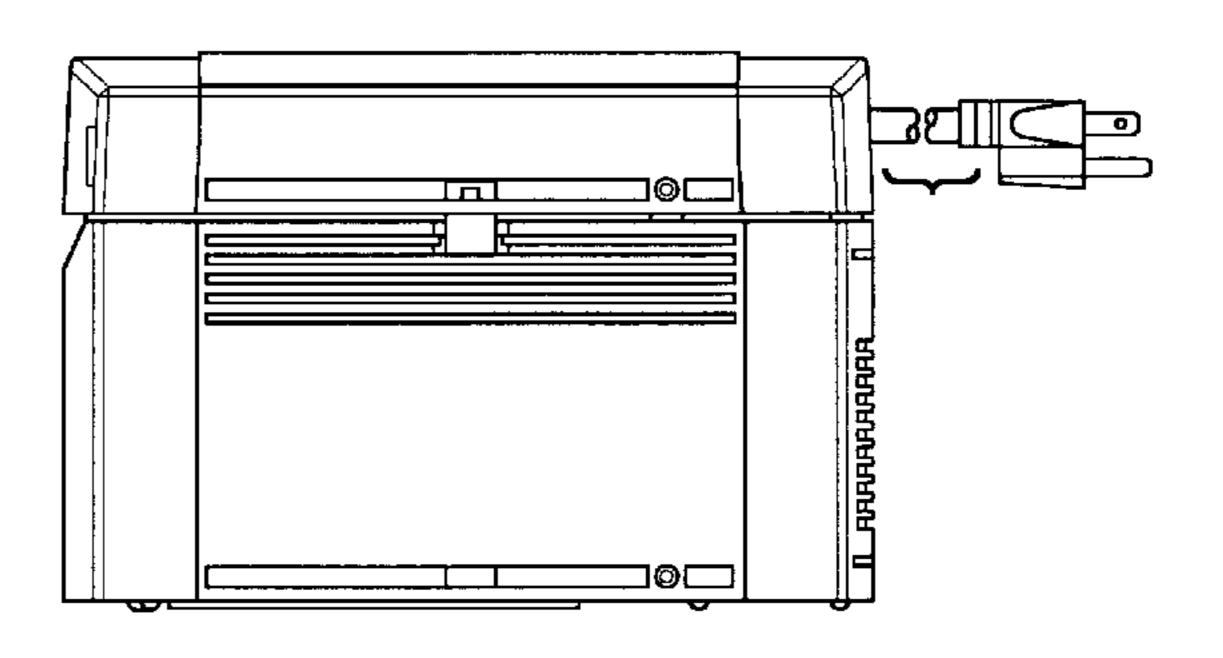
is a bottom view of the power pack system as shown in FIG. 18;
